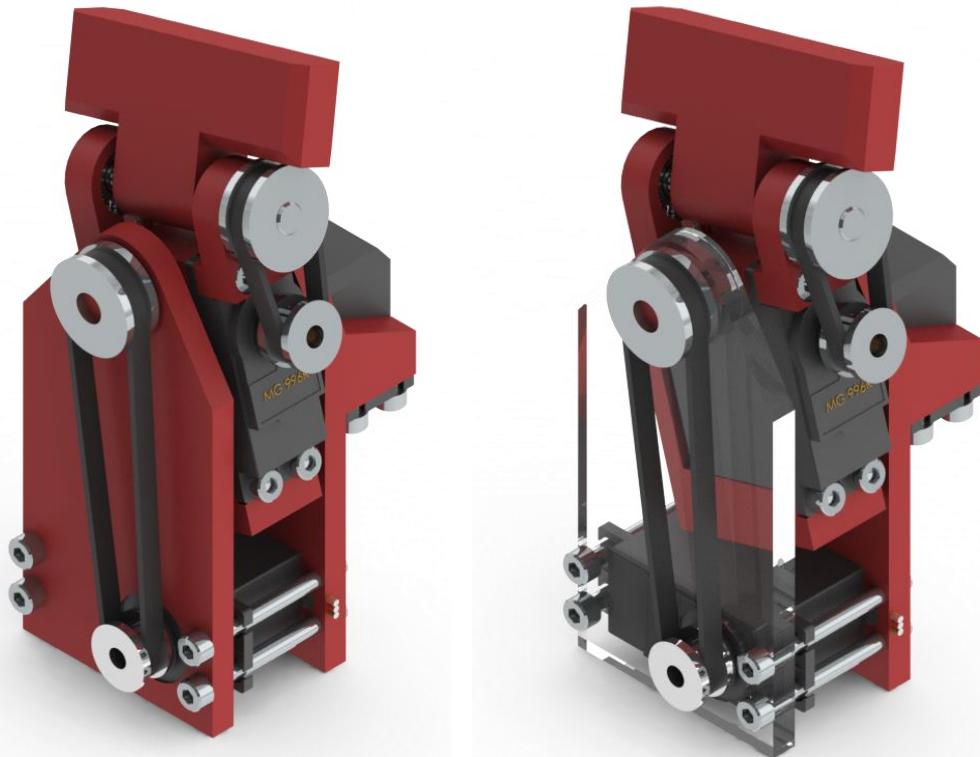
CAD design BHD02.3 exploded view and closeup, using servo model by Alfonso Cruz Collacca (2015)
